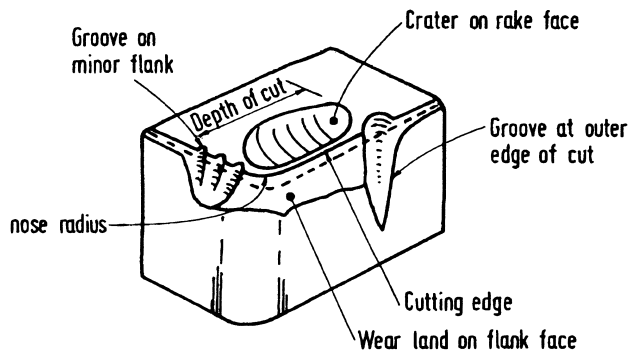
Various wear and fracture surfaces that may be present on a worn cutting tool.
